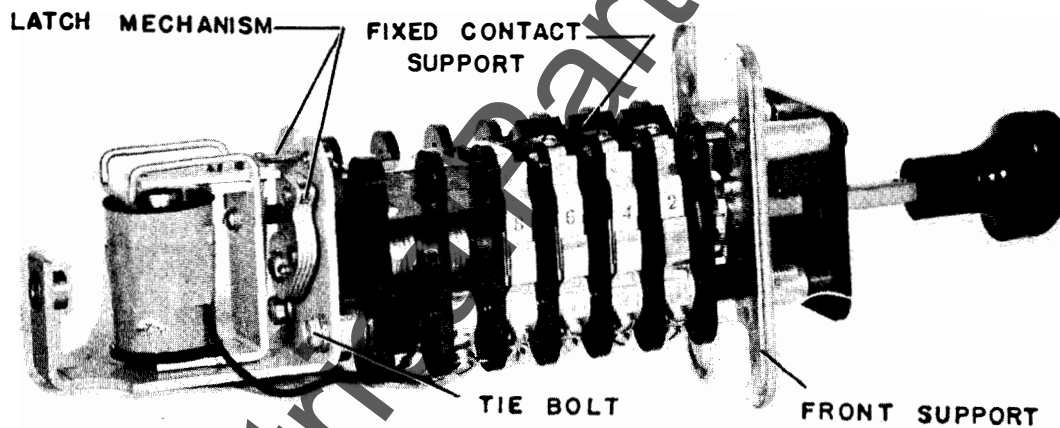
(8031895) Six Contact HEA Relay in Tripped Position, with Cover Removed
